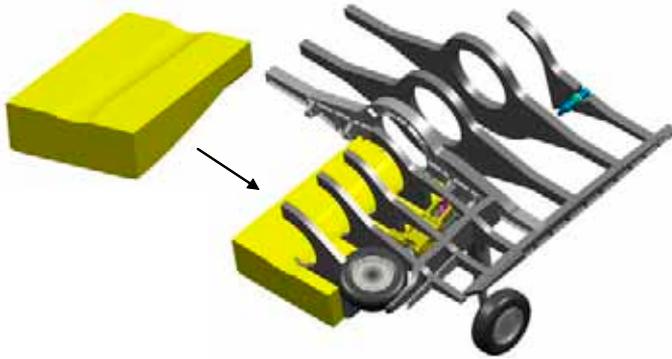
The landing gear bay converted into a fuel tank, and a new landing gear with the mounting integrated into the wing structure.
